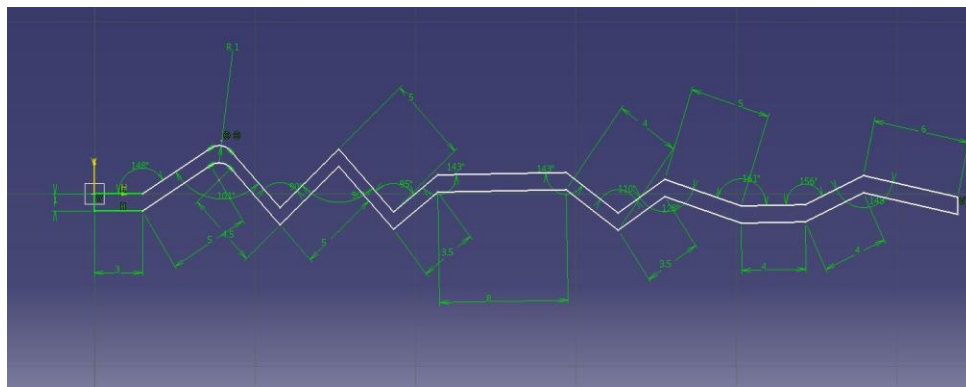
Corrugated Airfoil with dimensions CAD Model
